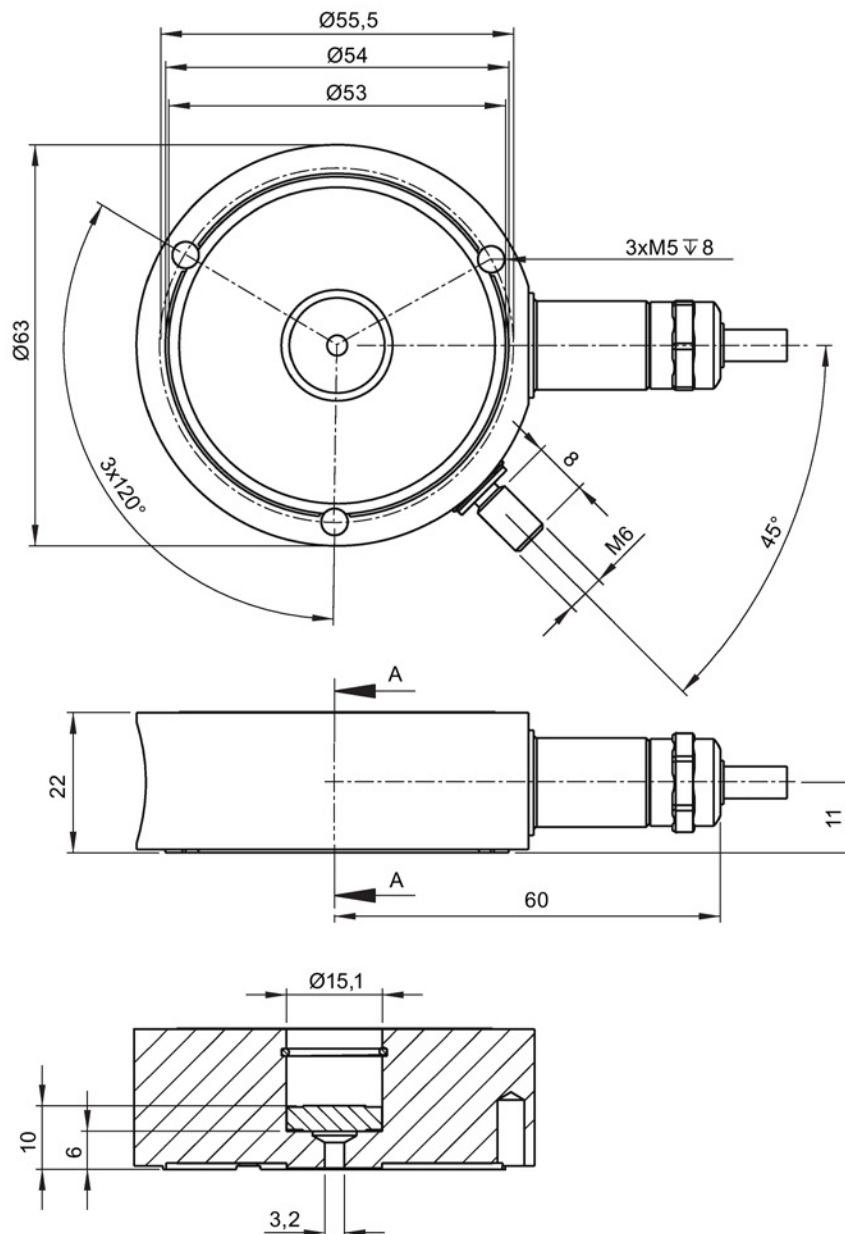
Dimension drawing for SIWAREX WL280 RN-S SA, rated load 60 kg, 130 kg, 280 kg
